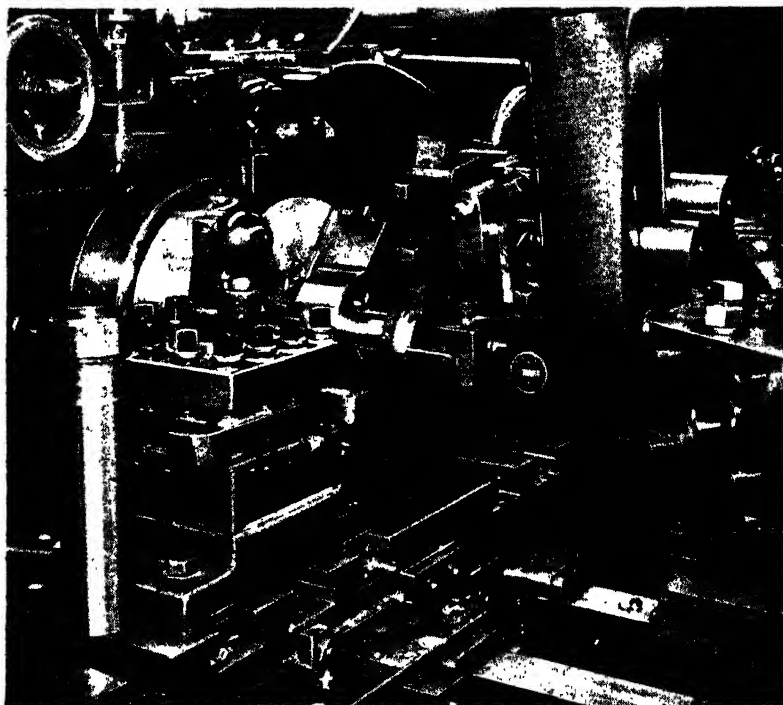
Tooling Provided on Turret Lathe that Produces Packing Gland Nuts from Solid Duralumin Bars
